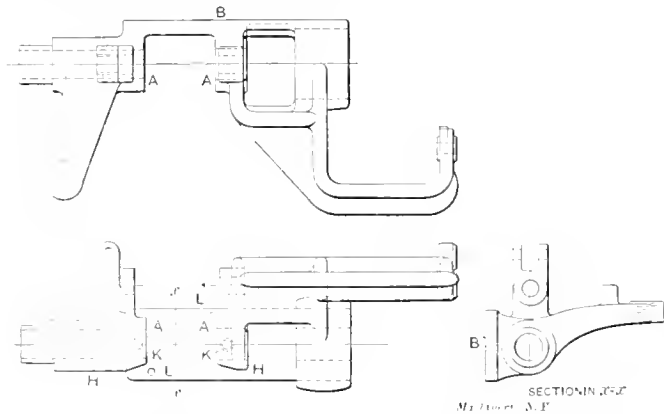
Motion Bracket for Automatic Screw Machines—drilled in Jig Fig. 9.
